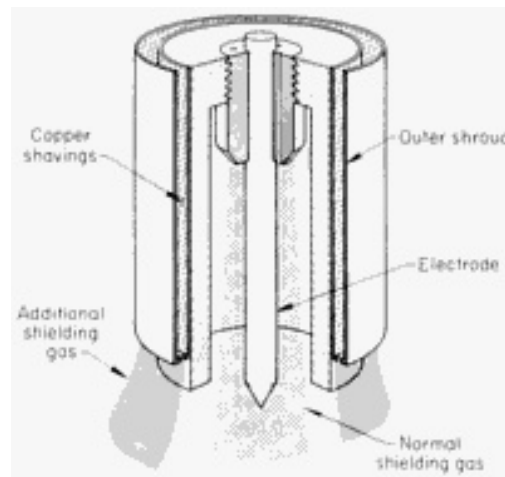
SECTIONAL VIEW OF A TORCH NOZZLE EQUIPPED WITH AN OUTER SHROUD. COPPER SHAVINGS IN THE OUTER SHROUD PROVIDE ADDITIONAL GAS SHIELDING FOR MANUAL INERT GAS WELDING.
